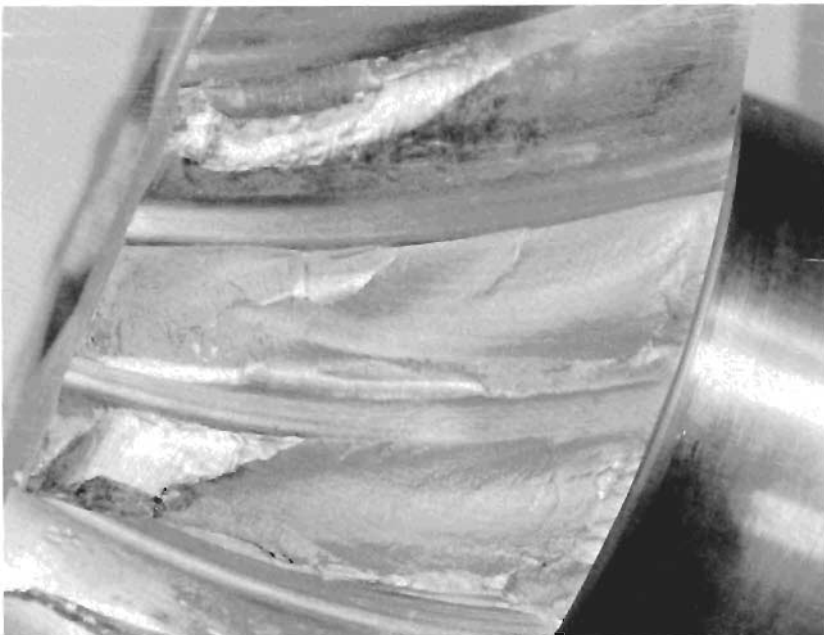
Spiral bevel pinion, 1.0X. Tooth bending fatigue toward the heel end caused by misalignment in the assembly 0.020 in. out and 0.020 in. back from the gear.
